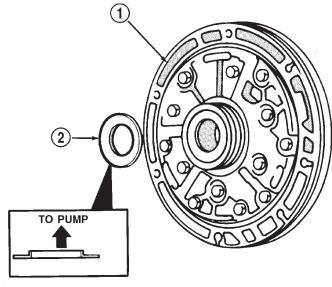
Installing Input Shaft Thrust Bearing And Race Assembly
